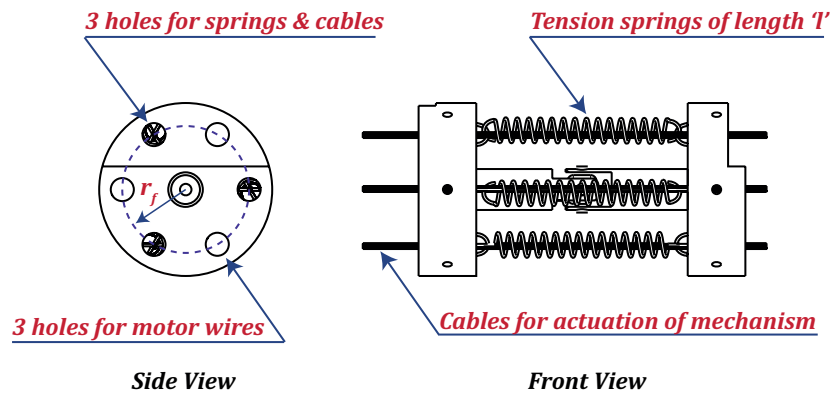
The proposed tensegrity mechanism with universal joint, springs and cables
